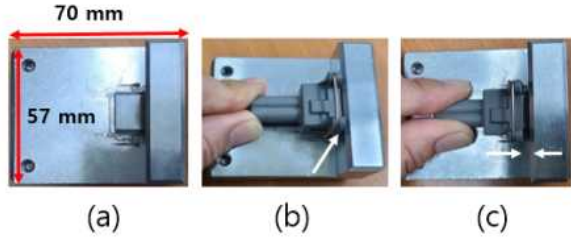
Manual inspection equipment (a) Inspection equipment appearance; (b) Normal product connector insertion into inspection equipment; (c) Insert the double seal connector into the inspection equipment (2 mm gap occurs)
